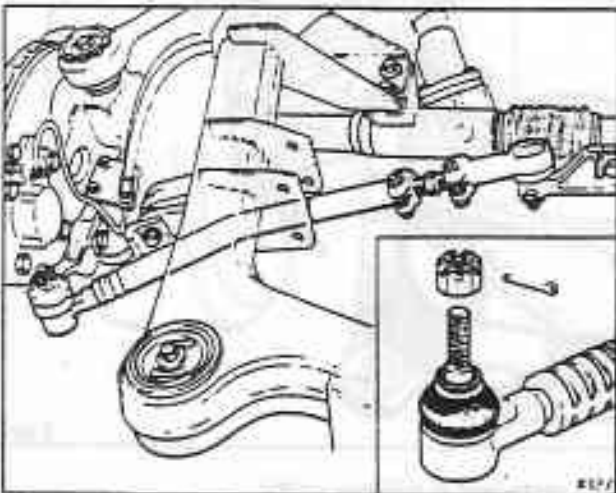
Steering linkage (Applicable to cars fitted with the one-piece track rods)
